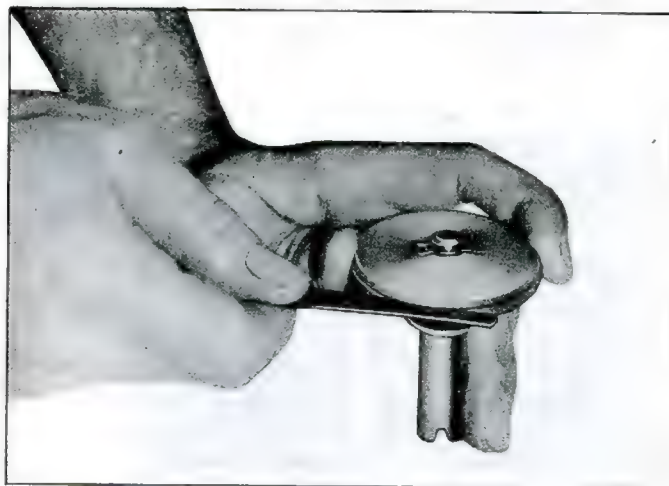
E-13—Measuring Piston-to-Ring Clearance
